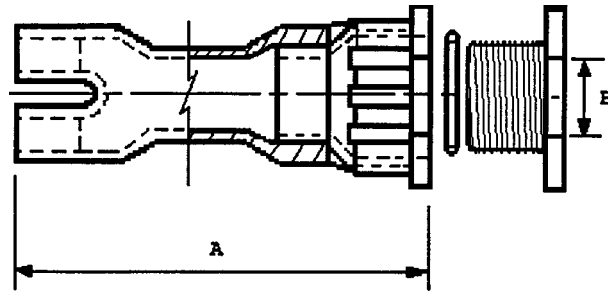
Type I-Multi-Legged Standard Cable Entry Seals
